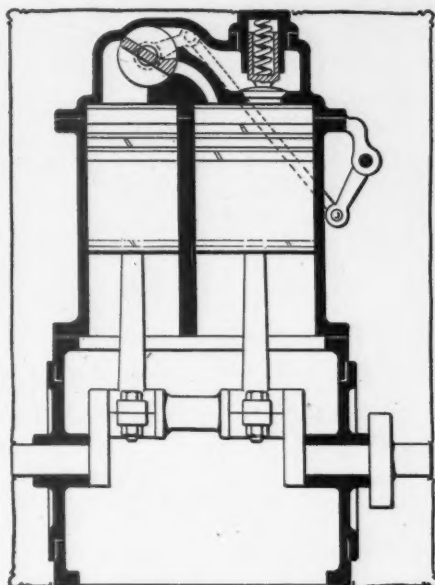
BRAZELLE ROTARY-VALVE MOTOR
